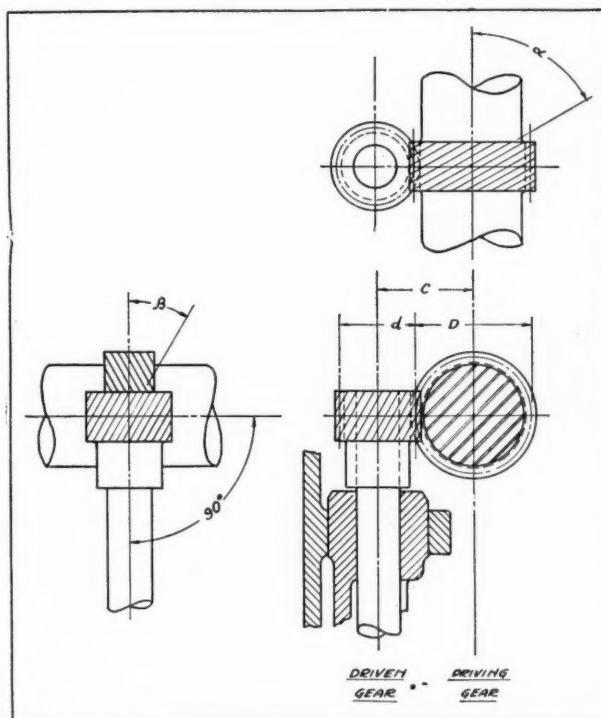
Typical layout of helical gears with shafts at 90 deg.
